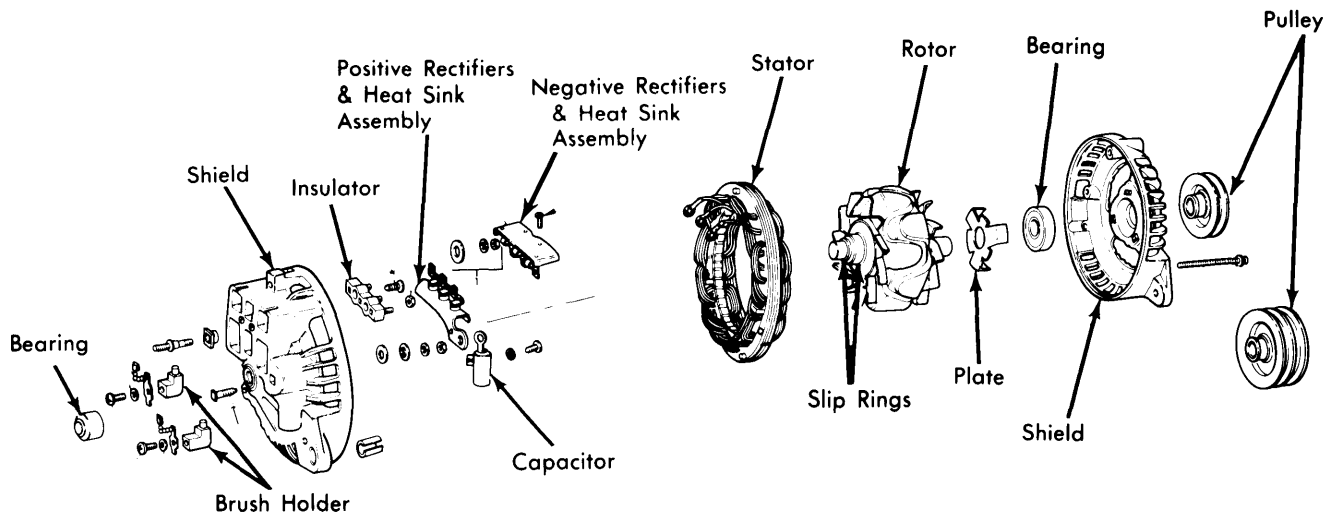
Exploded View of Typical Chrysler Corp. Alternator
